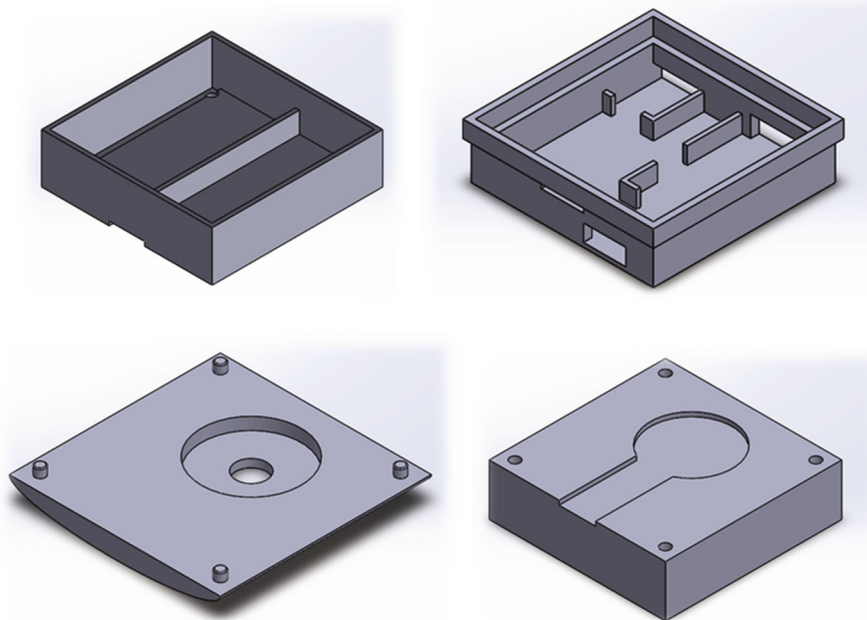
Internal design of the prototype (details in the Supplementary Materials).
